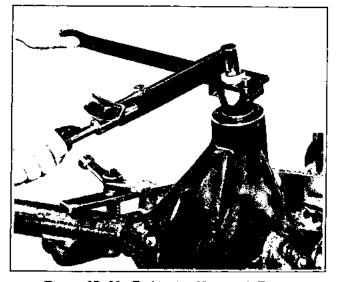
B-28. Tightening Nuts with Torque Wrench and Socket
